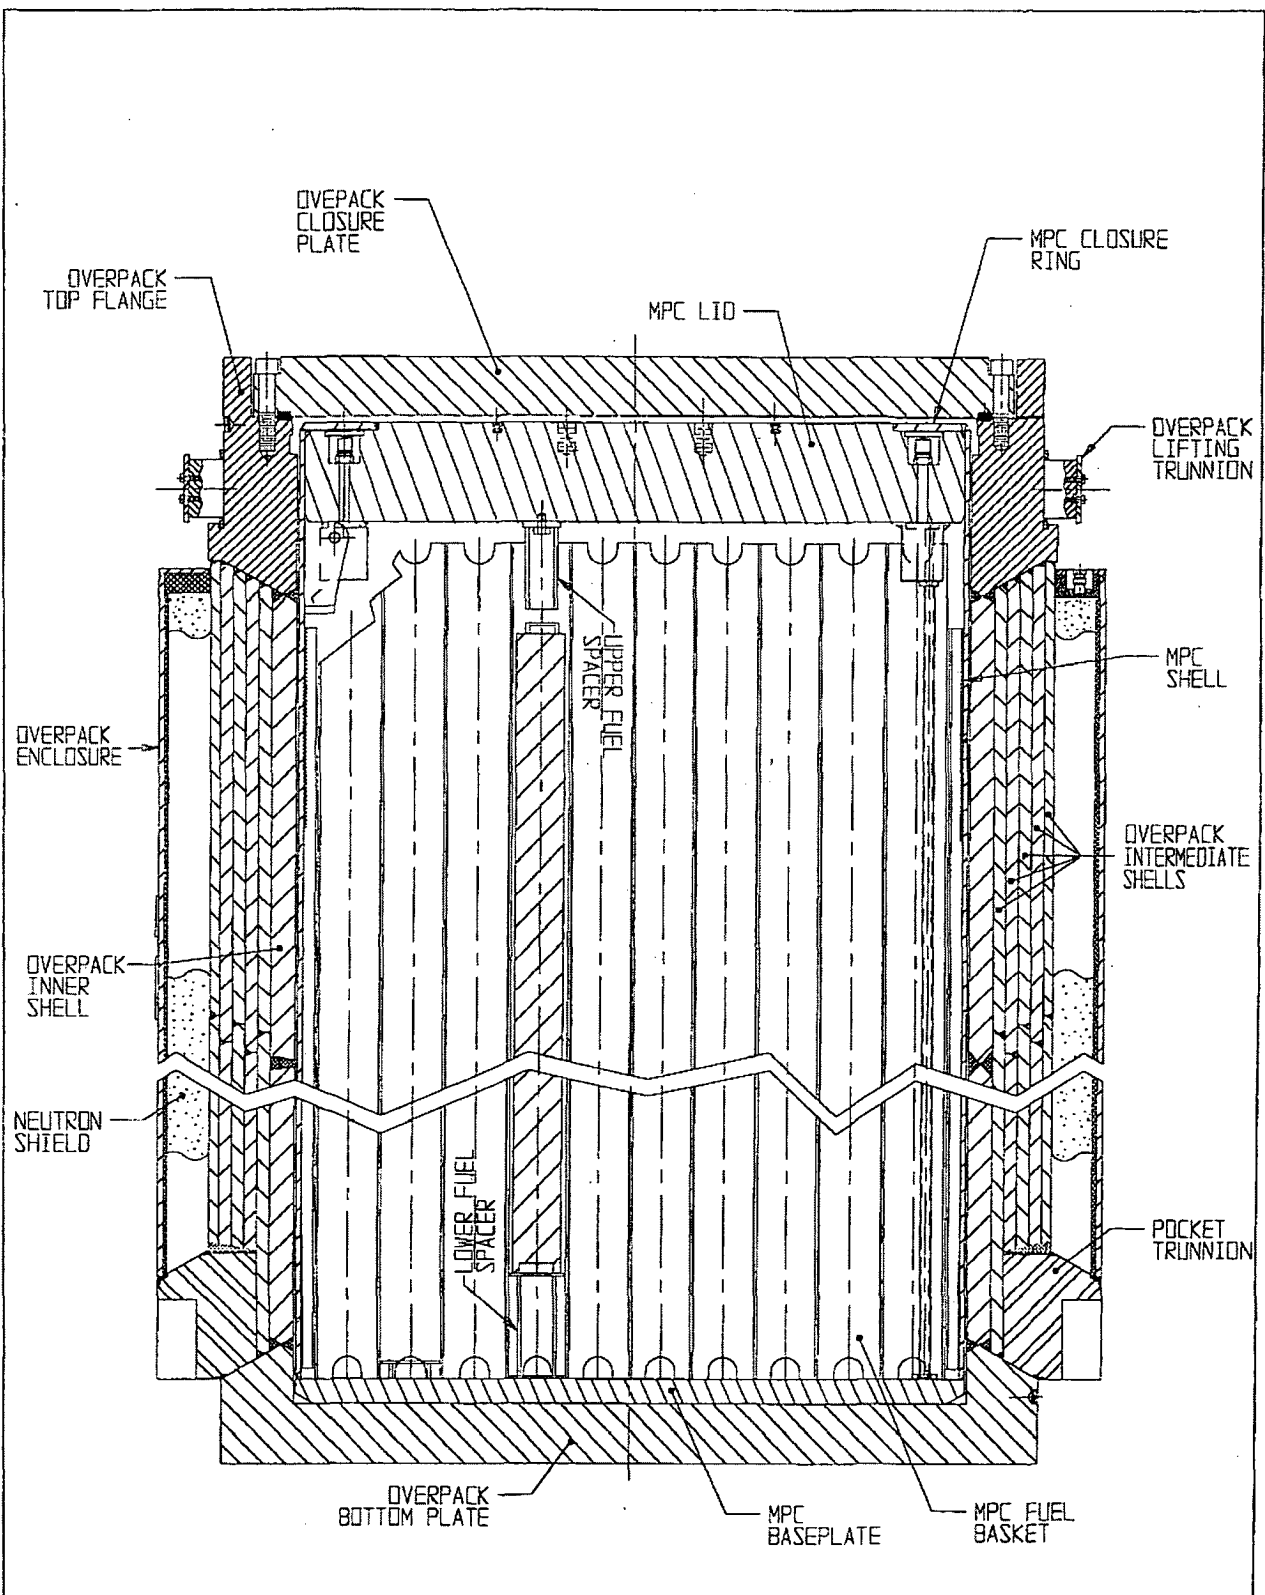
; CROSS SECTION ELEVATION VIEW OF HI-STAR 100 SYSTEM
